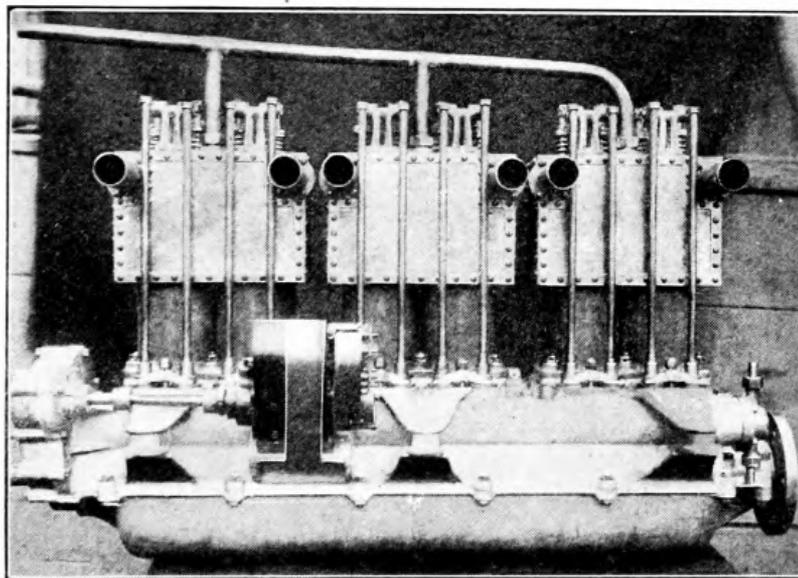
The 50 h.p. six-cylinder Buchet engine.
